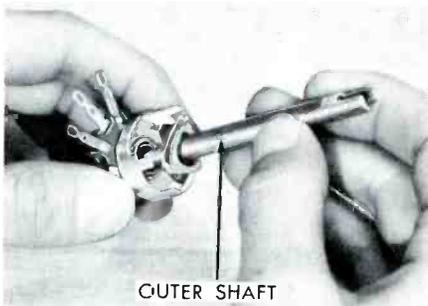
E. The Outer Shaft Is Placed Over the Inner Shaft.
